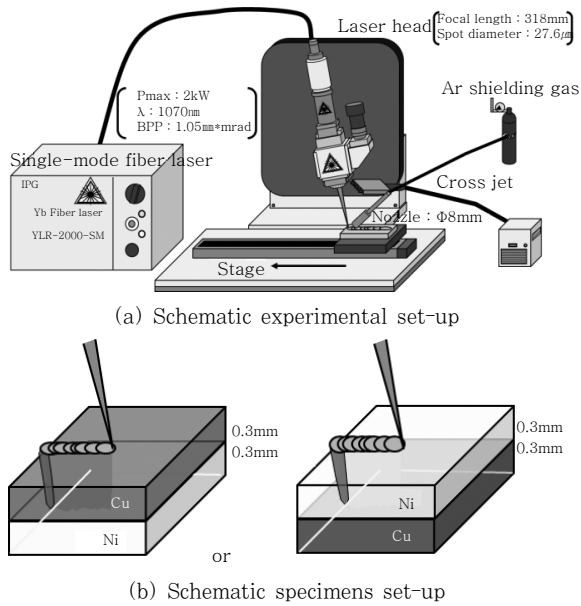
Schematic diagram of experimental set-up for 2 kW single-mode fiber laser welding of Cu and Ni dissimilar metals
